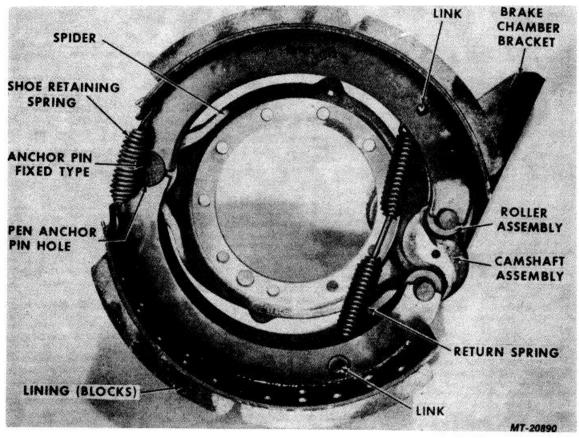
Typical Rear Axle Brake Group with Fixed Anchor Pins
